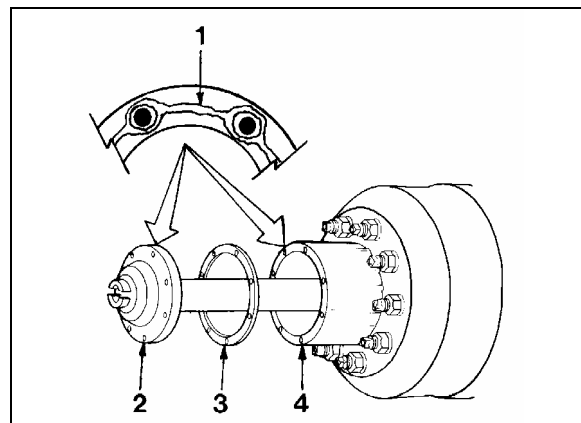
AXLE SHAFT INSTALLATION 11003
